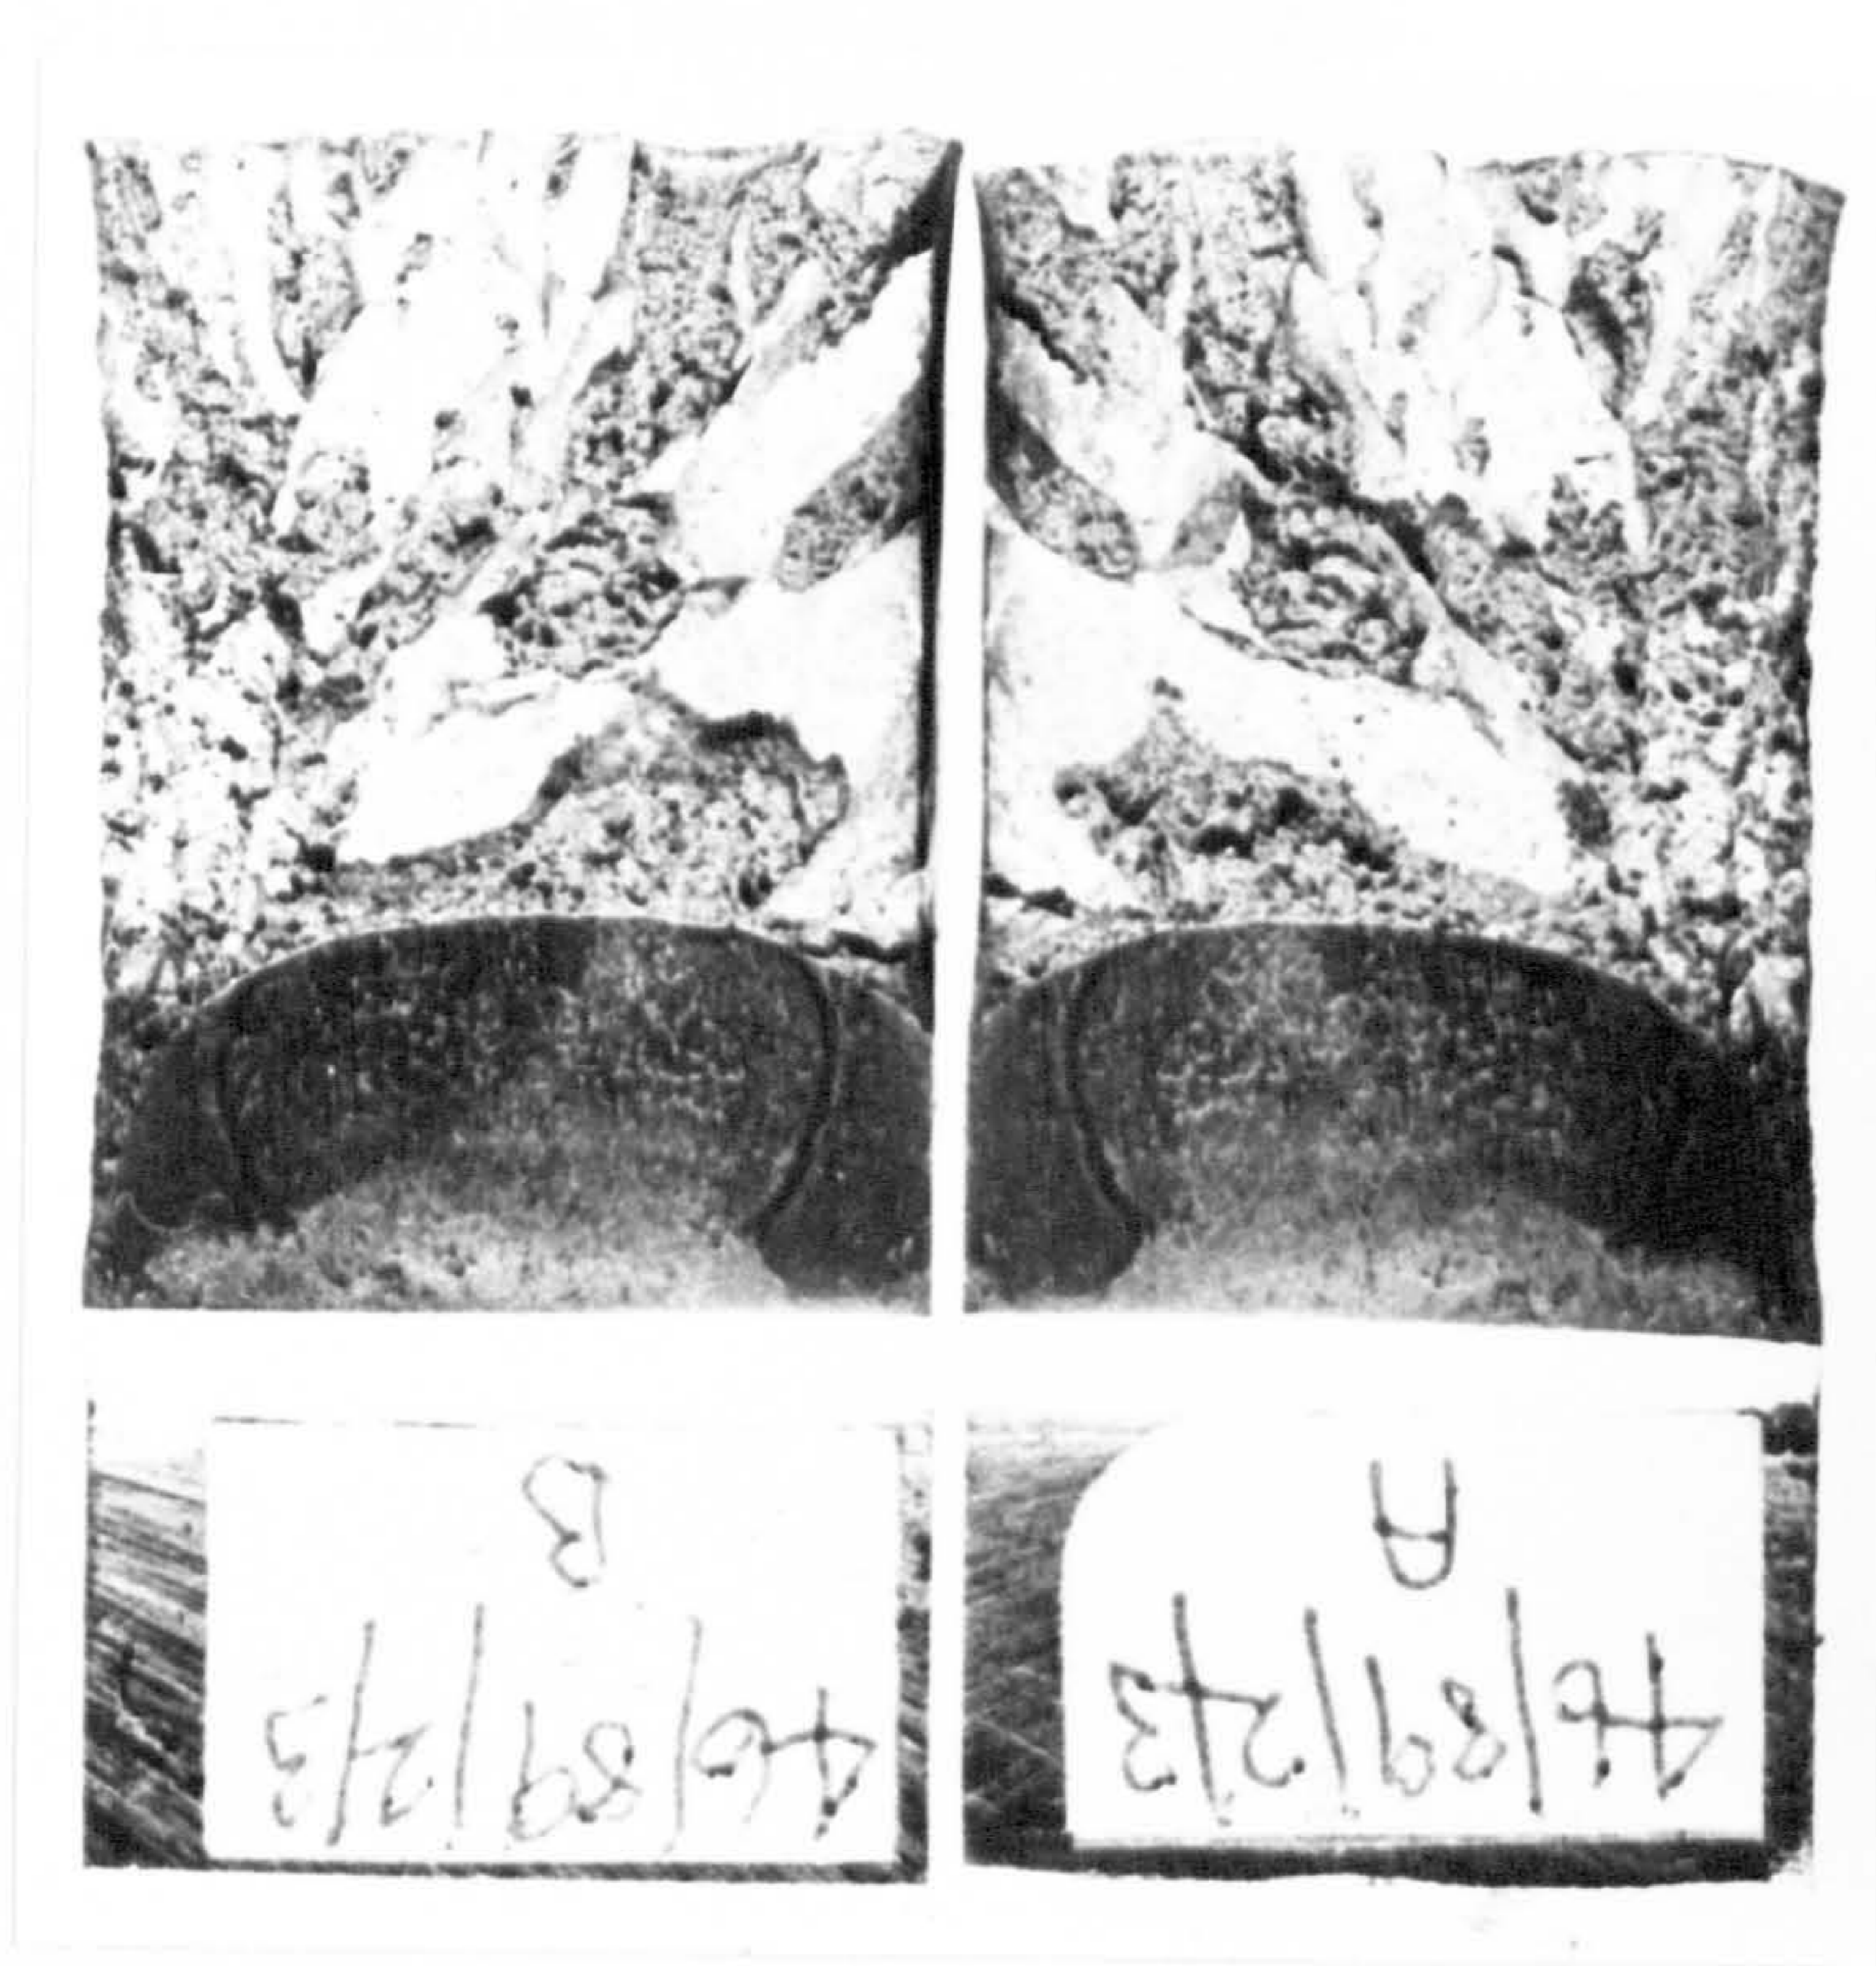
The fracture surface of a HHQT sample showing I.F. being preceded by fibrous crack growth.
